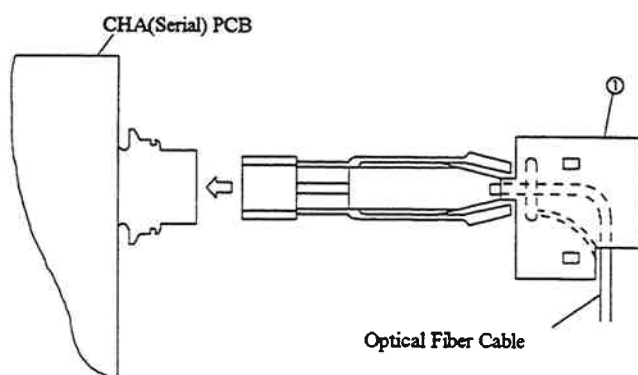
Connection of Optical Fiber Cable
